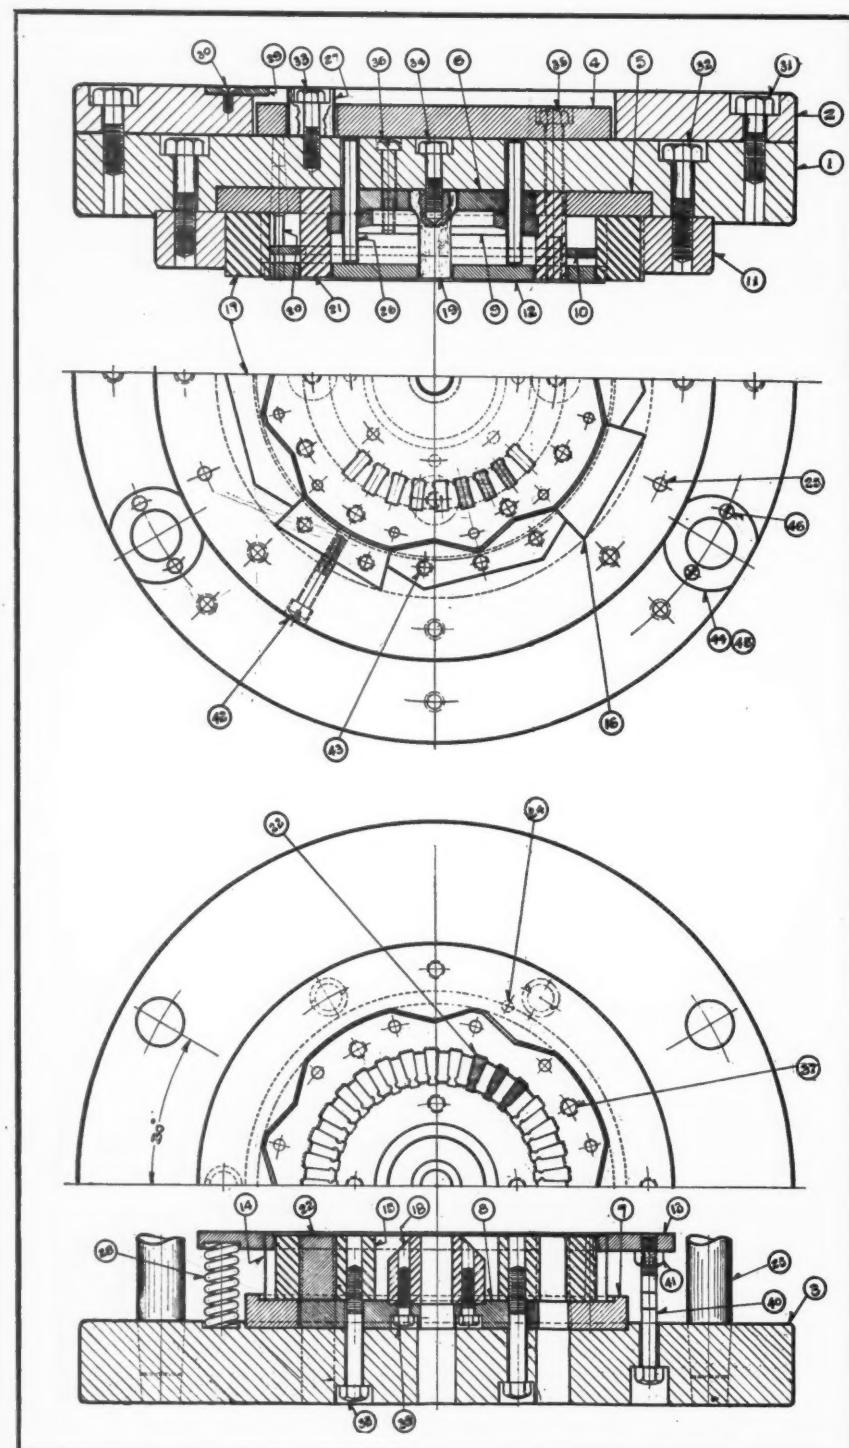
Compound Die Constructed for Blanking Stator Laminations
